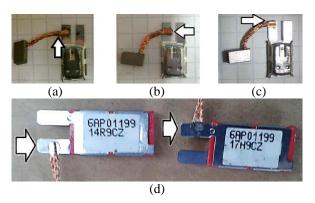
Defects in the joints of the thermal protection plate - collector brush wire
